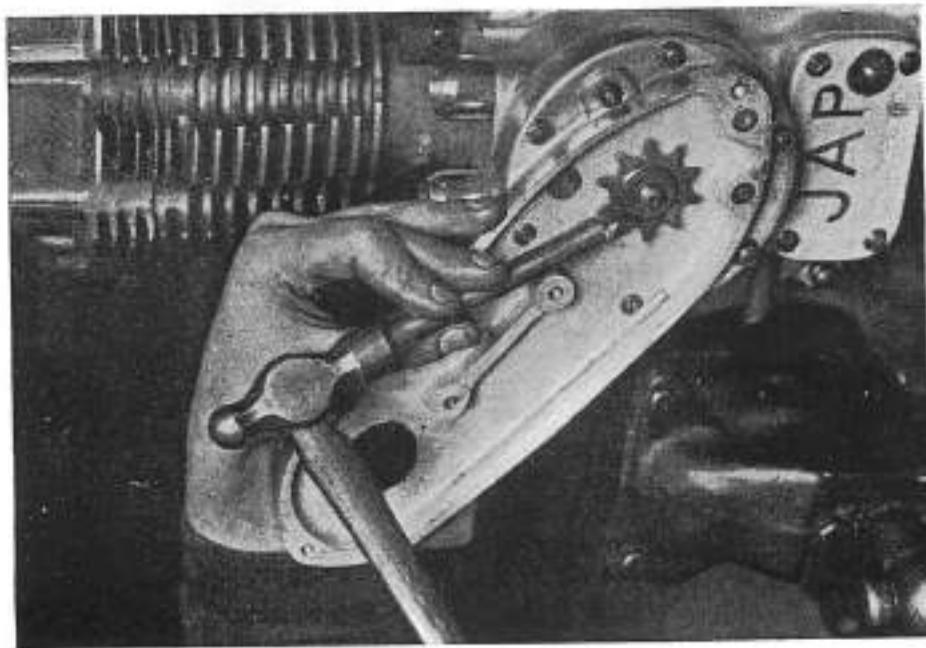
REMOVING THE MAINSHAFT DRIVE PINION
